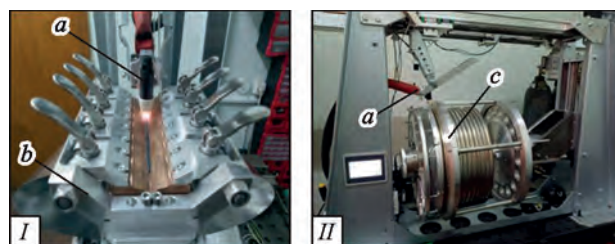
Modular equipment for assembly and welding of structural elements of a transformable structure (I) and their subsequent joining into a single structure of a periodic profile (II)
